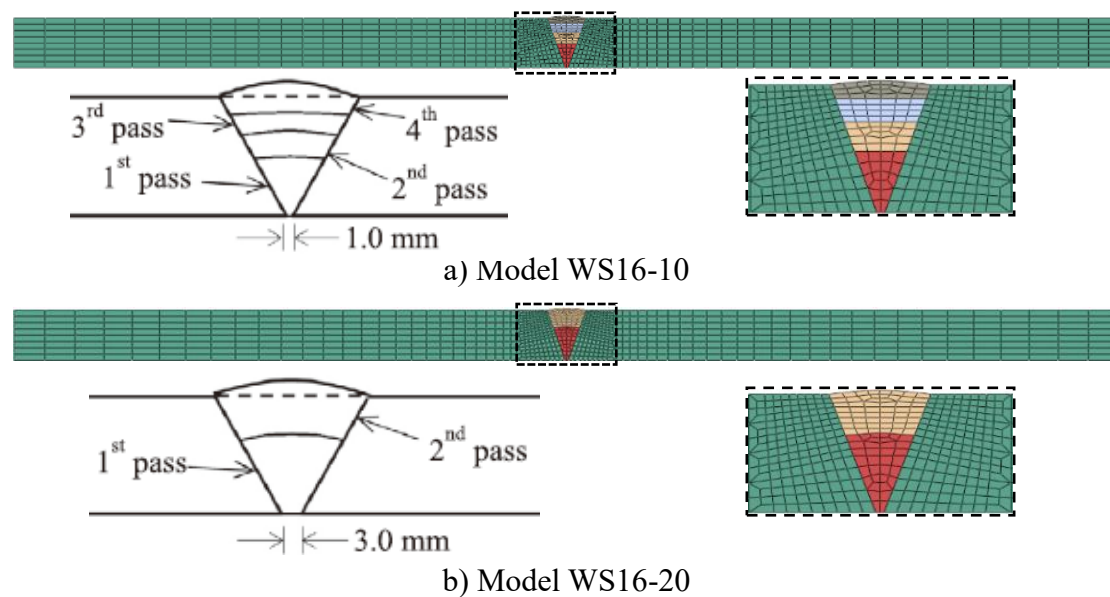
Heat transfer models of S690 welded sections
